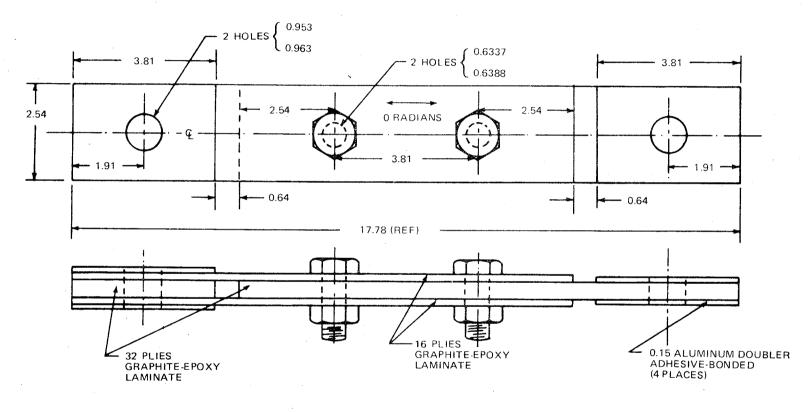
SHEAROUT AND BEARING (TENSILE) TEST SPECIMENS
